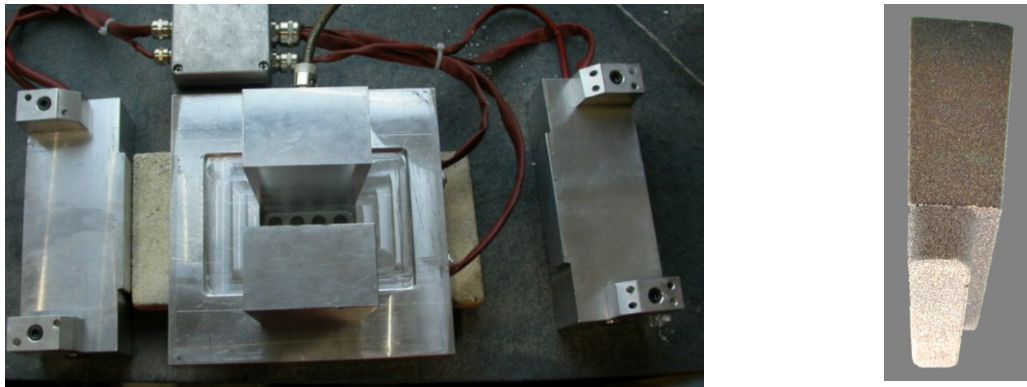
The core box for the core removal test cores with opened side parts (left) and a therewith realized sand core (right).
